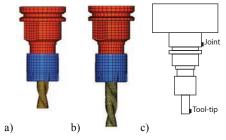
Screening tool FE model (a) New tool FE model (b) Joint location (c).
